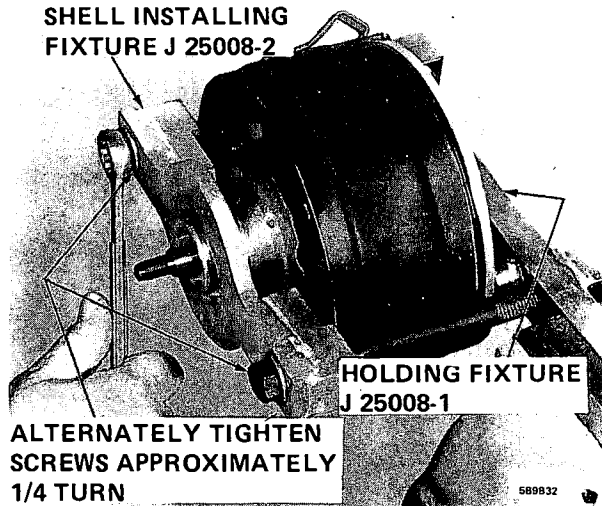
B-57 - Installing Compressor Shell - 4 Cylinder Compressor
